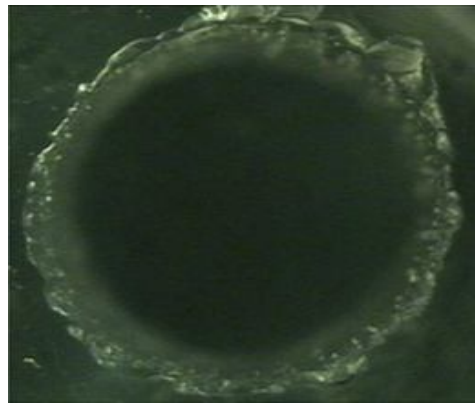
Glass machined hole view generated by traditional USM (Baek et al. (2013))
